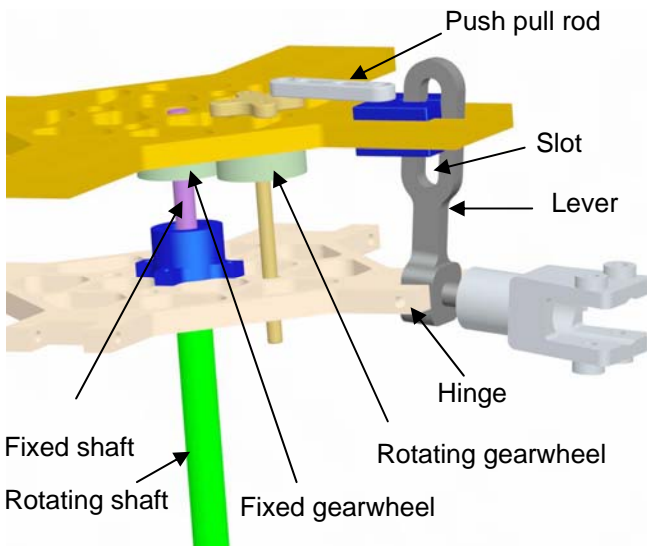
The forced flapping mechanism used in the radio-controlled demonstrator model
